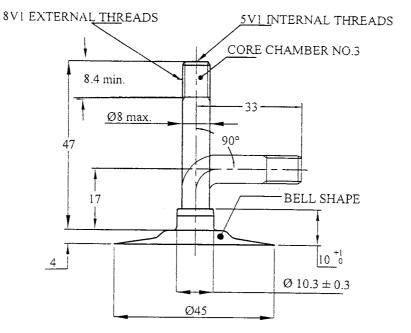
Rubber Covered Tube Valves — Passenger Car
